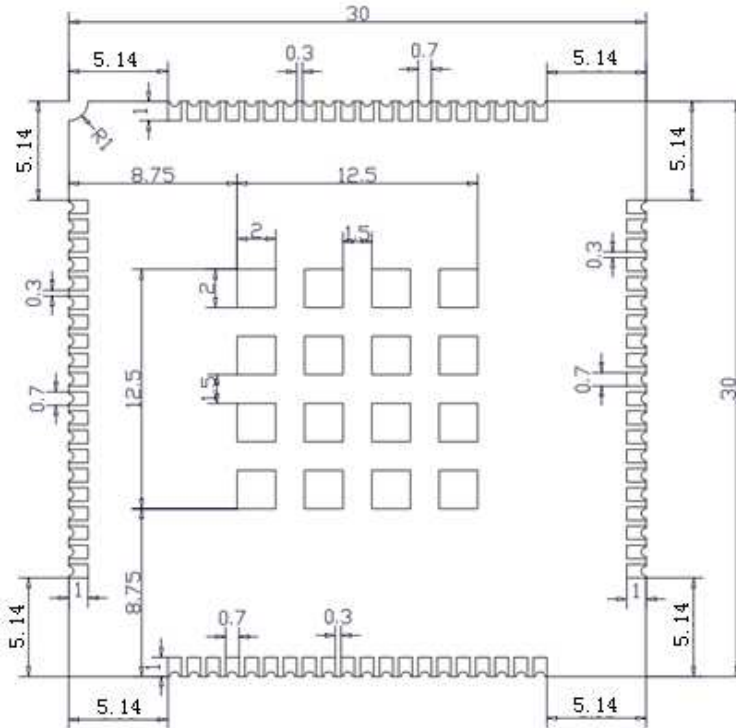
ME3630 Bottom Dimensions (Bottom view)
